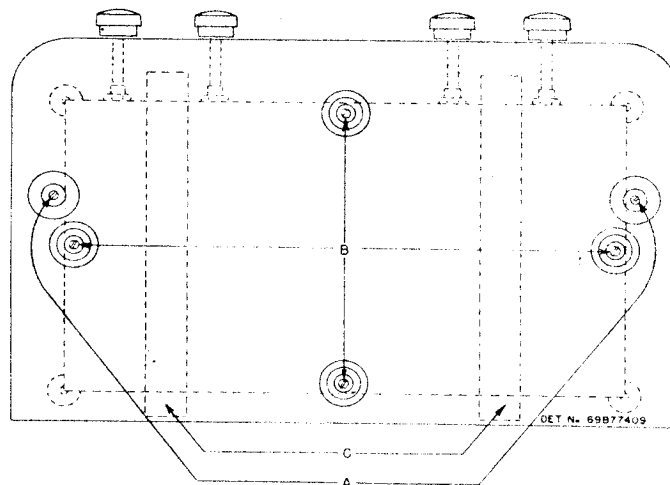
SHIPPING STRIP REMOVAL DETAIL
